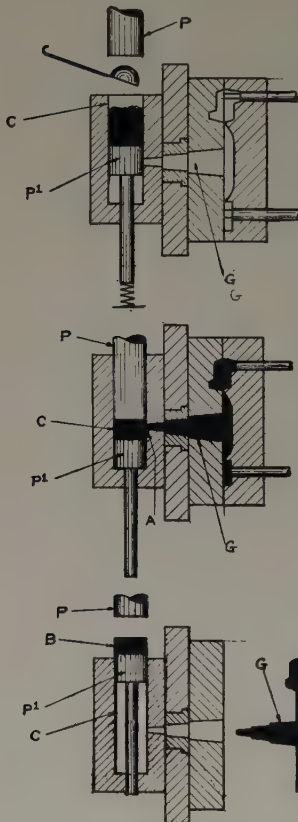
CASTING PRINCIPLE OF POLAK MACHINE. (FROM *Metal Industry*.)
